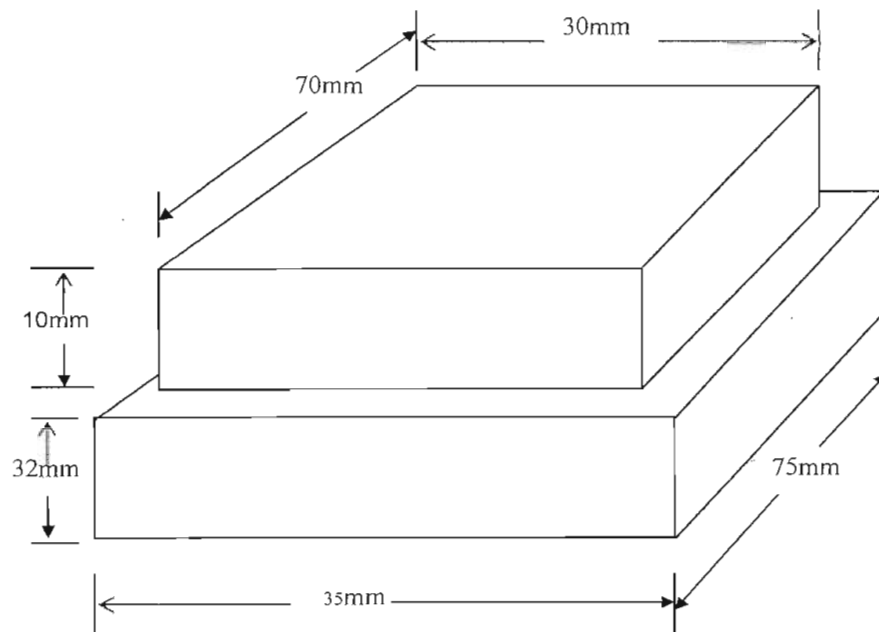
Dimension of Weld Pad for hardness and macro examination
